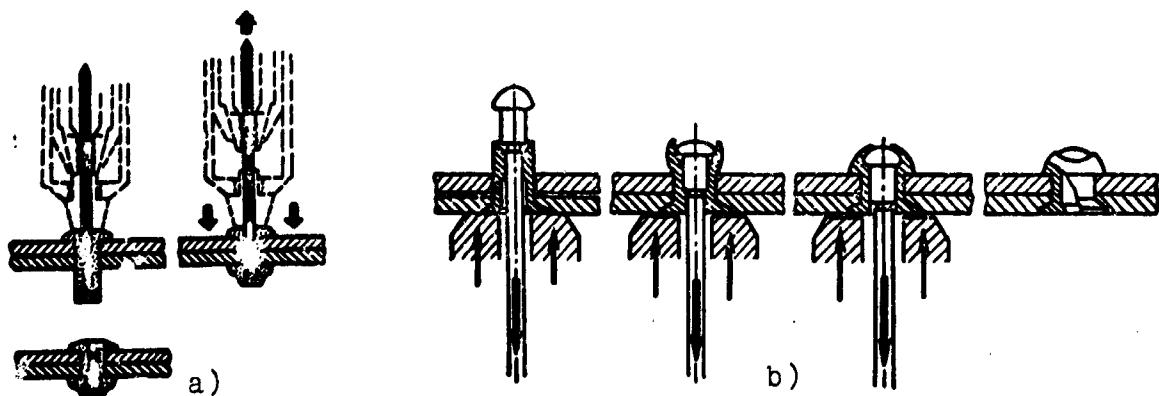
Proceed of riveting with hollow rivet: a) with core; b) with splitting.
